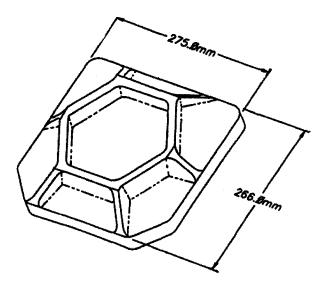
View of the back side of the grating blank showing its machined rib structure. (From Shipley et al.²⁴)
